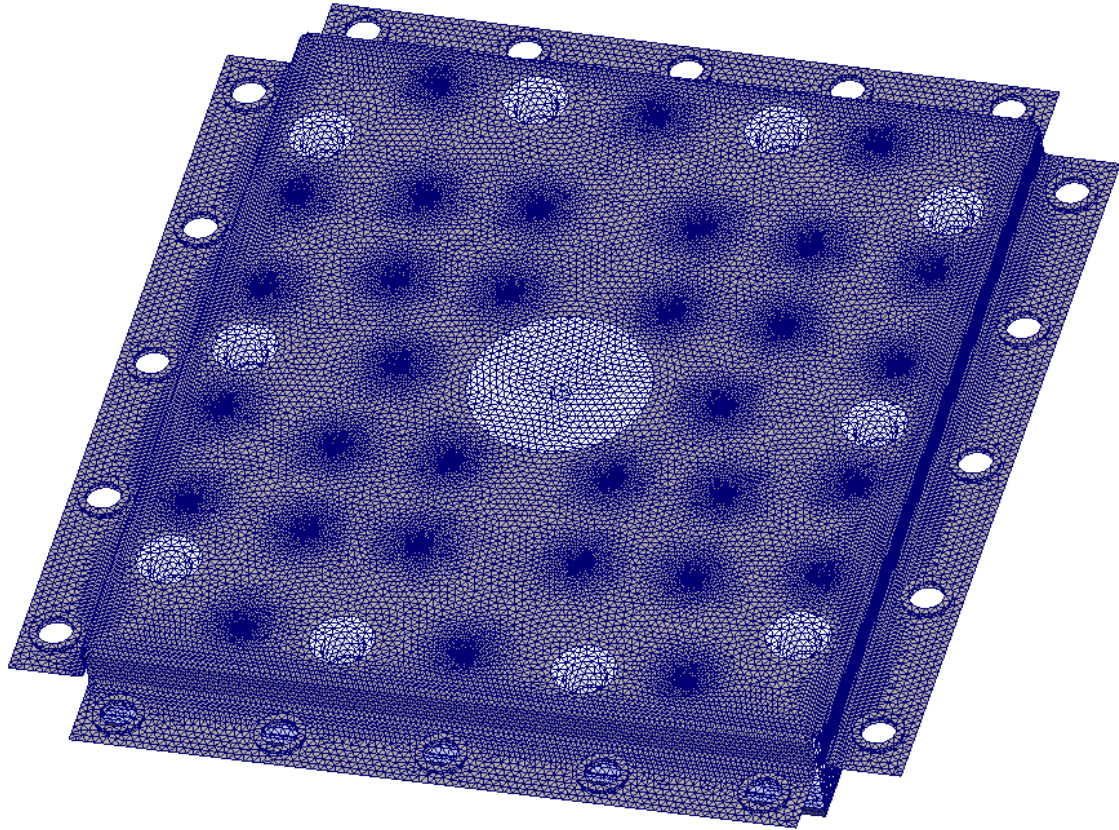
Dimple emboss clamping plate assembly with one cell mesh
